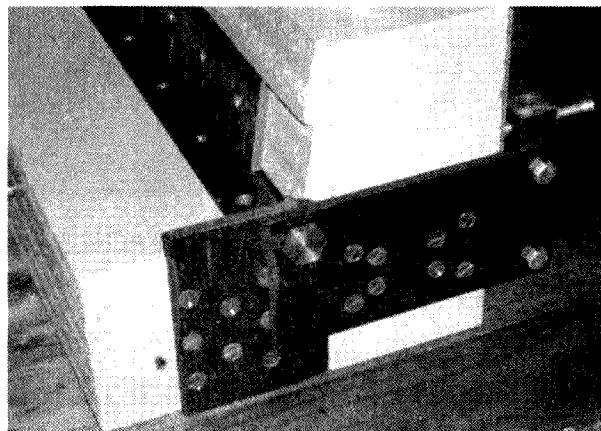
Aluminium sheet metal bender designed and built by Jim VK5JST
